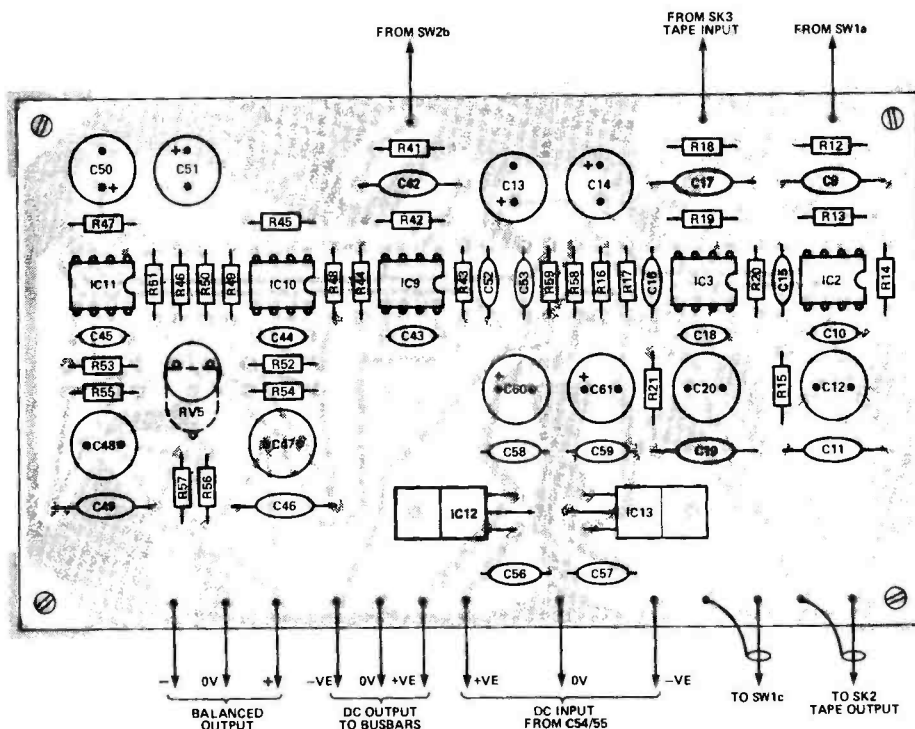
Component overlay of the tape buffer, balanced output and PSU board.
